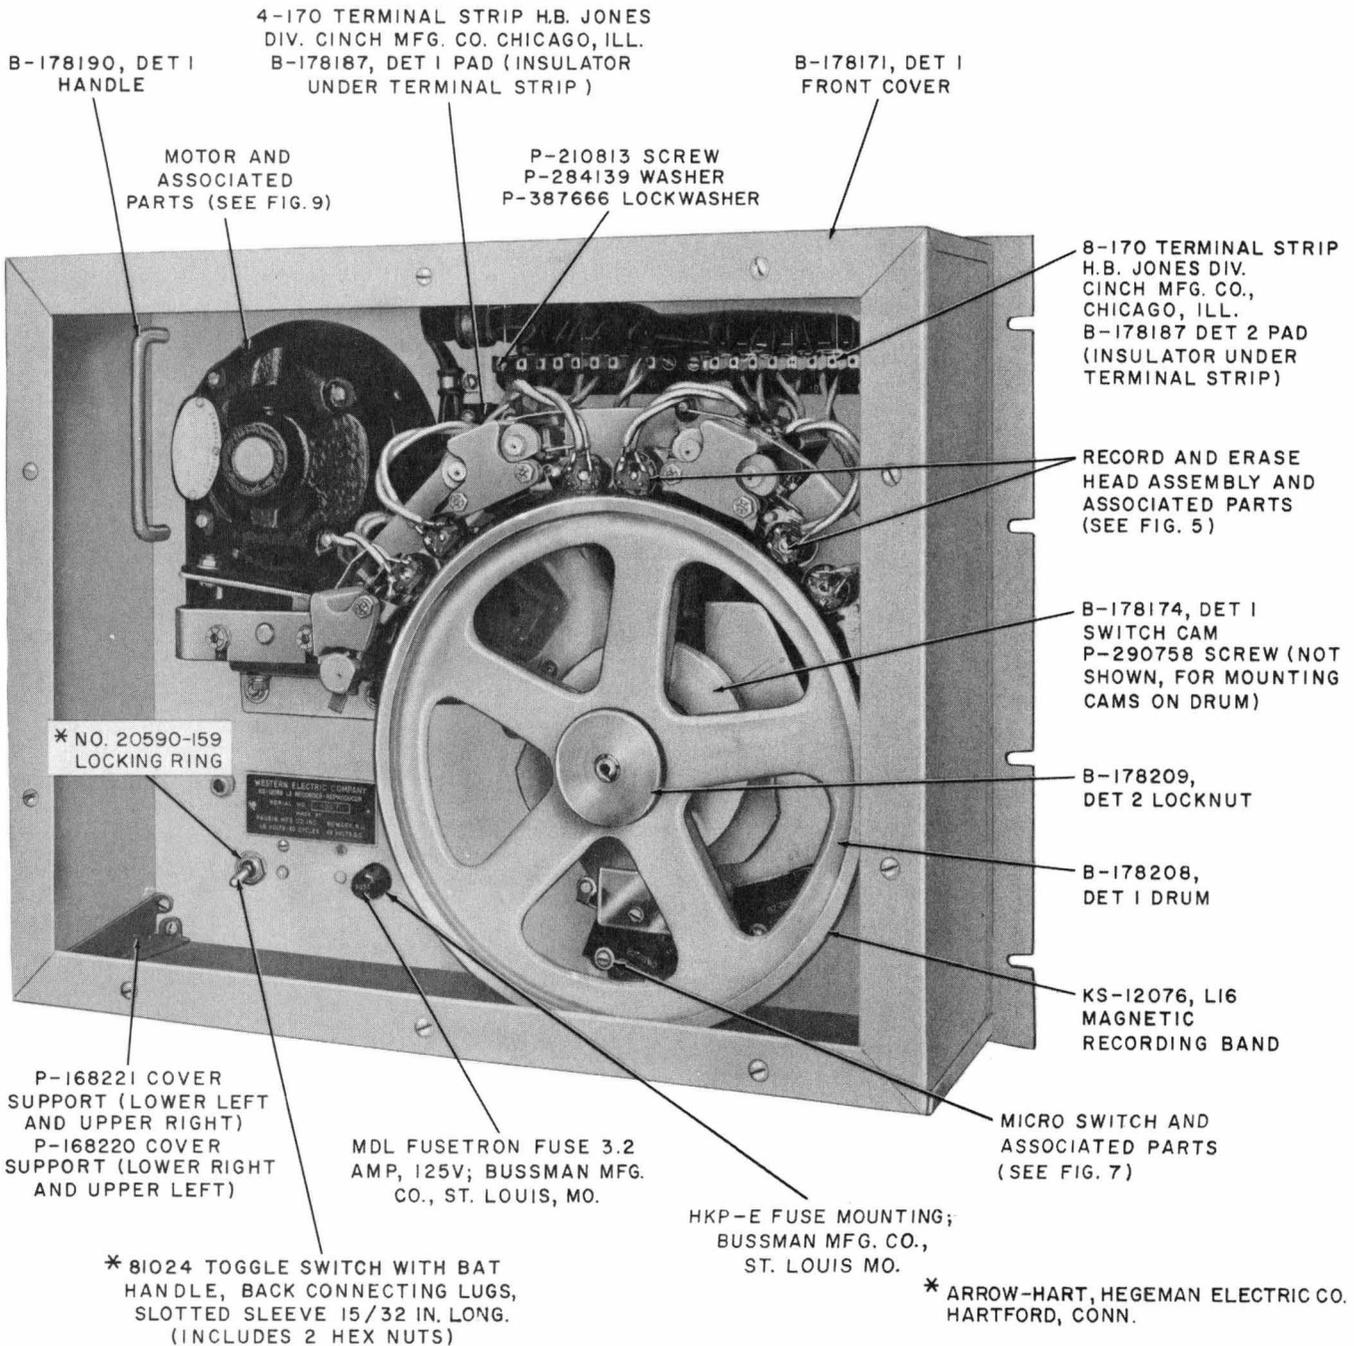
KS-12068 L3 and L3 Converted per X-4174 Recorder-Reproducers — Front View
